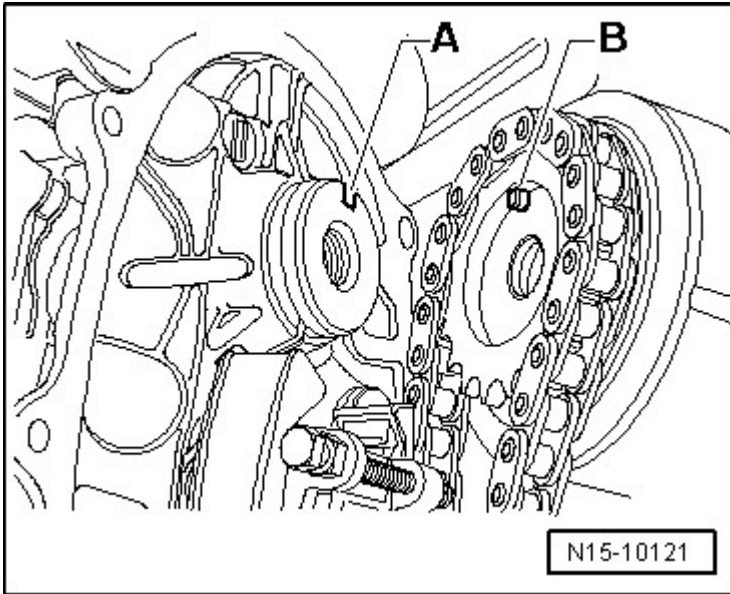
Identifying Camshaft Adjuster & Exhaust Camshaft Notch And Pin
